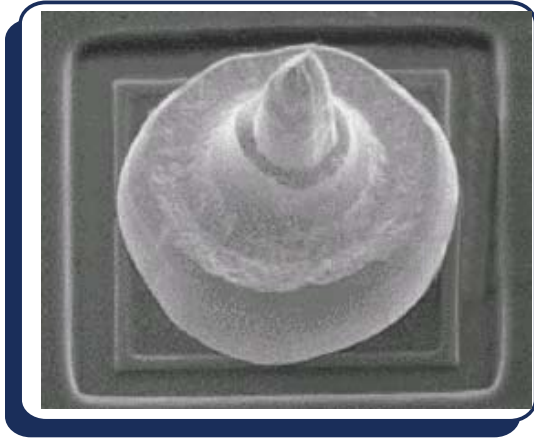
Typical gold “stud bump” for flip chip applications. The bump is formed by breaking off a gold wire after the gold ball bond is made to the chip pad. Photo courtesy of Valtronic USA.
